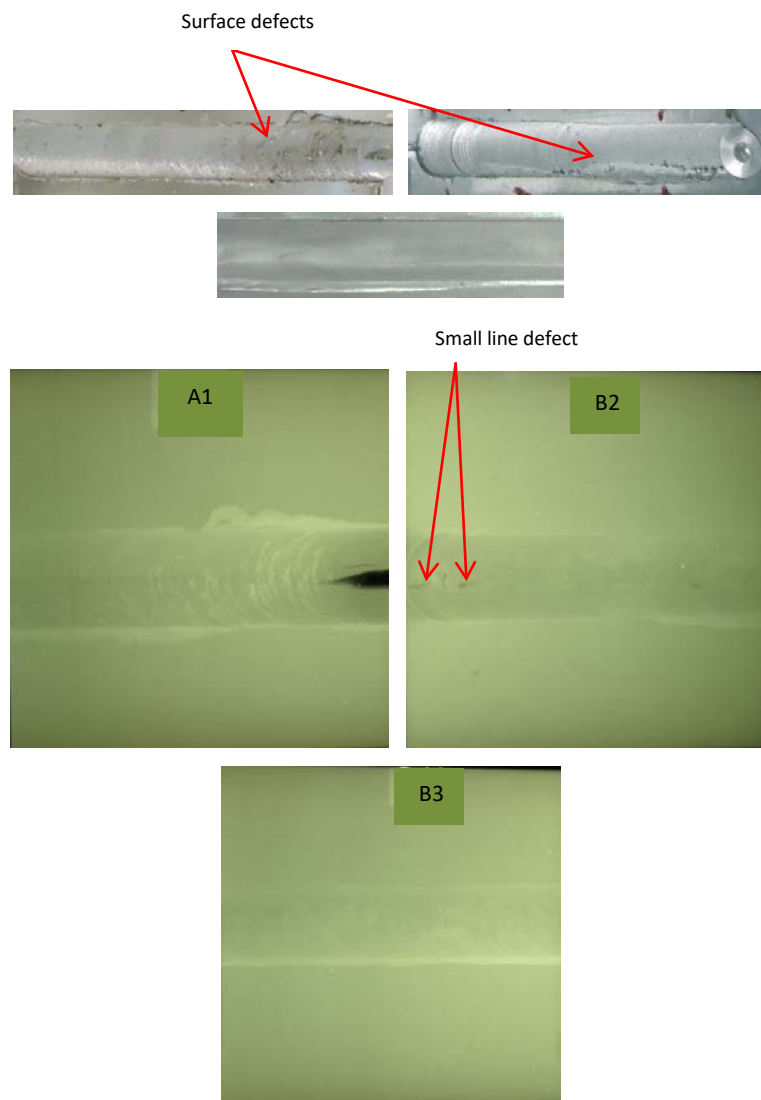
Photographs of X-ray radiography for FSW joints of samples A1, B2, B3
